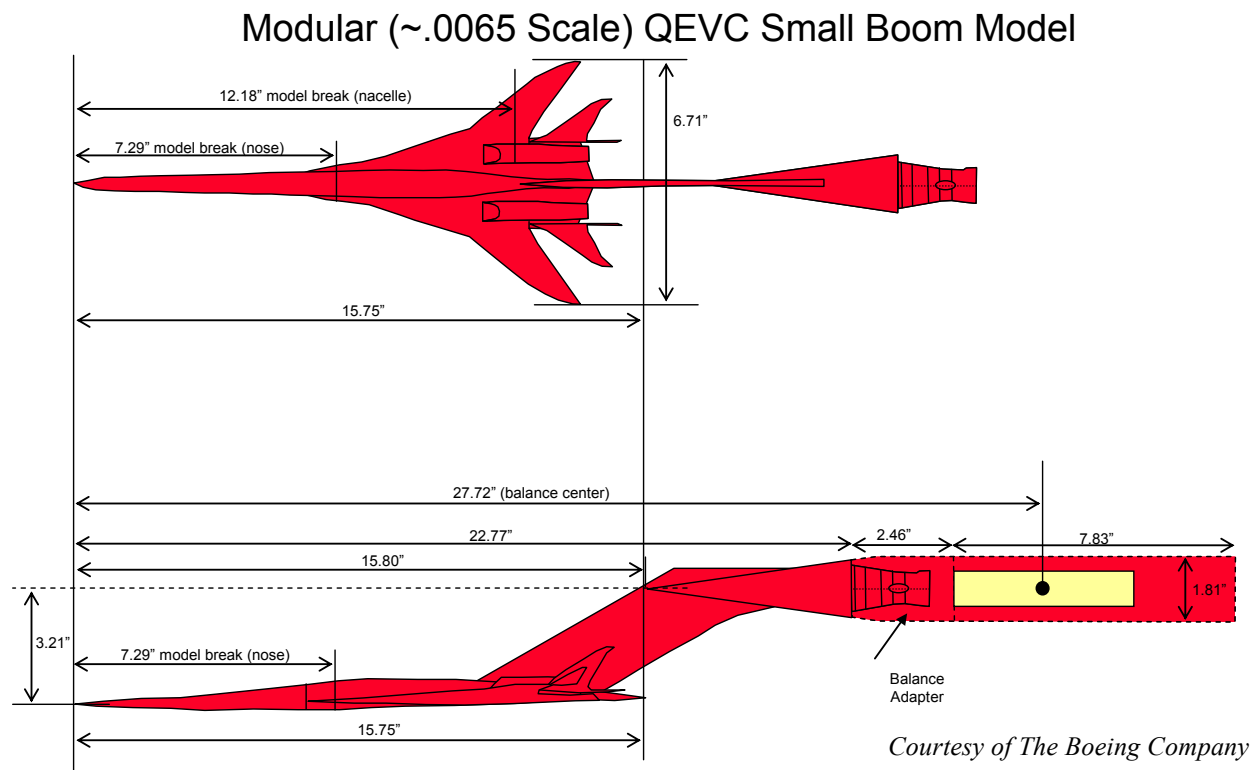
Boom1 model top and side view drawings with VS1 strut and balance adapter
